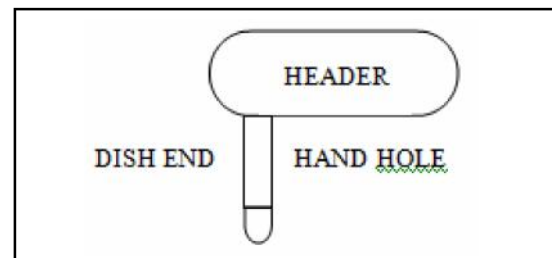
Typical hand hole pipe and dish end of the pipe headers
